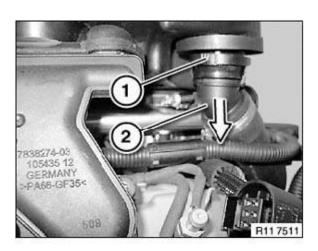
Identifying Idle Actuator Incoming Air Fastener And Hose Courtesy of BMW OF NORTH AMERICA, INC.
